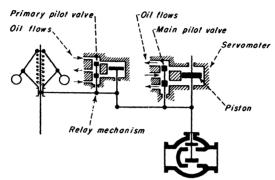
Centrifugal governing mechanism with double hydraulic-power amplifier using pilot valves.
